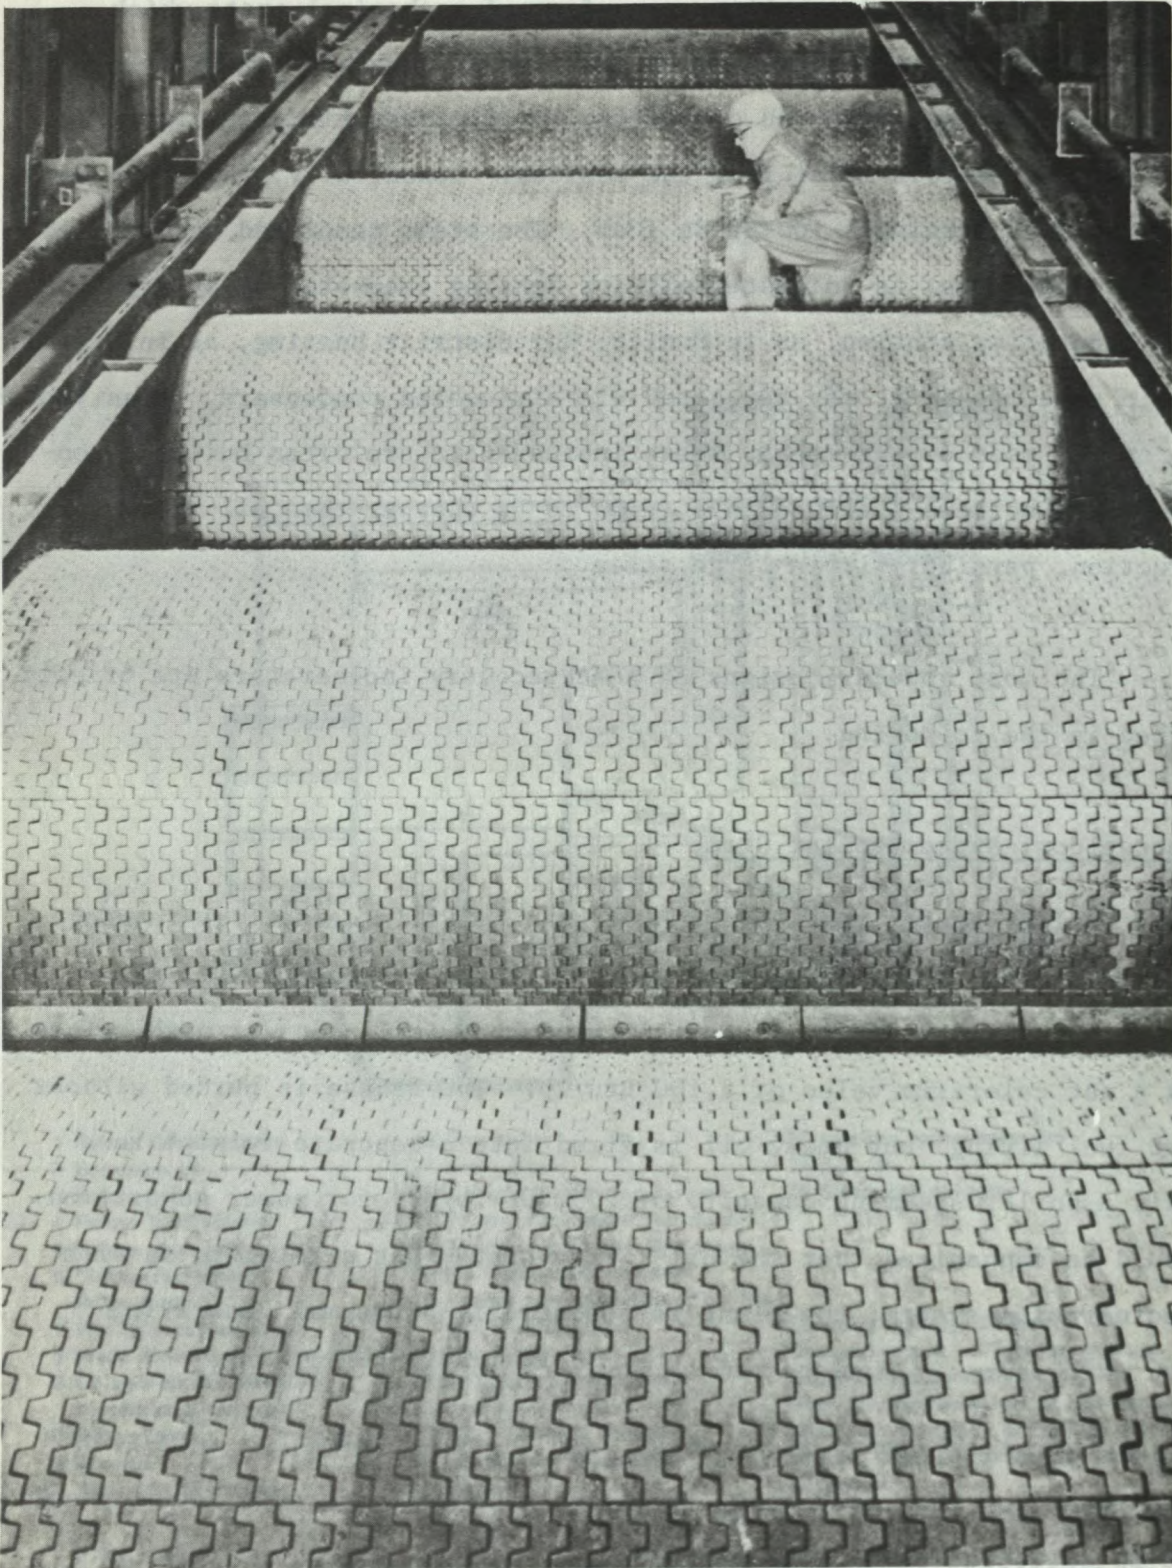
A view of the Duesseldorf-System roller grate during assembly. Courtesy Vereinigte Kesselwerke, A.G. Duesseldorf, W. Germany.
